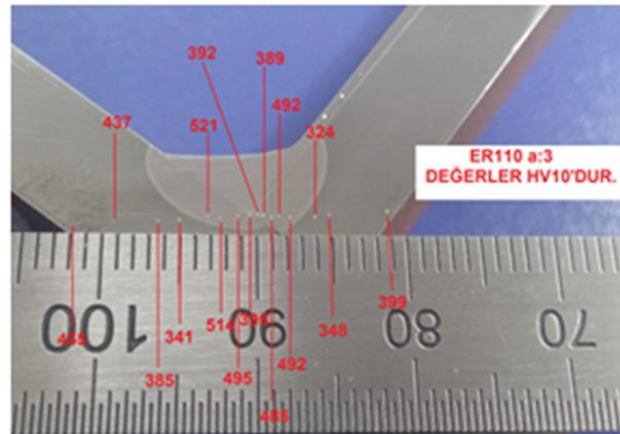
Hardness values of the sample with 3 mm welding height (bottom line)
